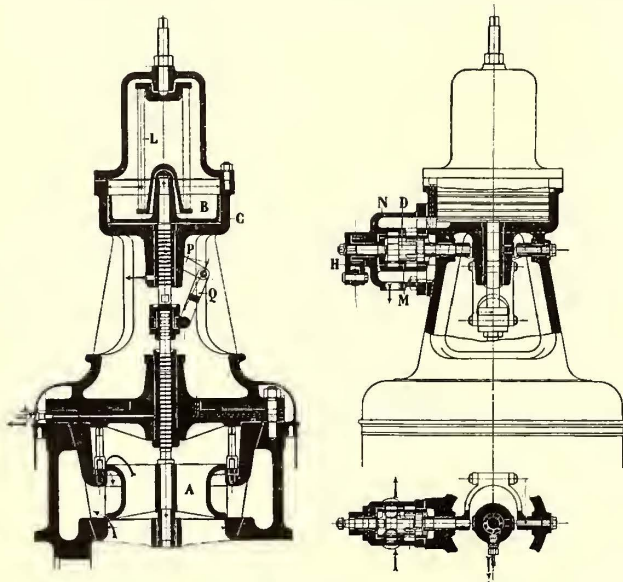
12,000-hp Turbine, Details of Valve Gear
